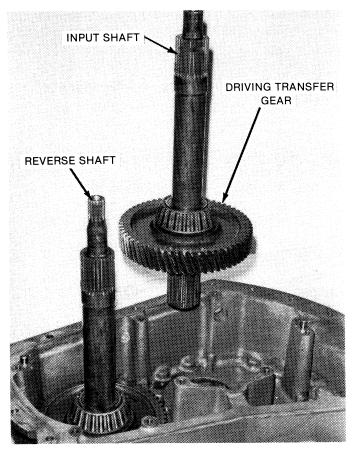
Input Shaft and Driving Transfer Gear Removed.
